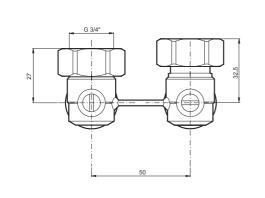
Dimensions Verafix-VKE angle with flat seal and cone
